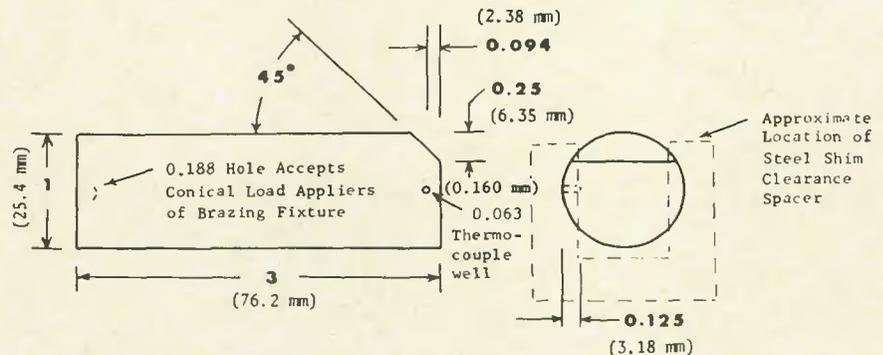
Scale drawing of specimen-half used in brazing experiments
